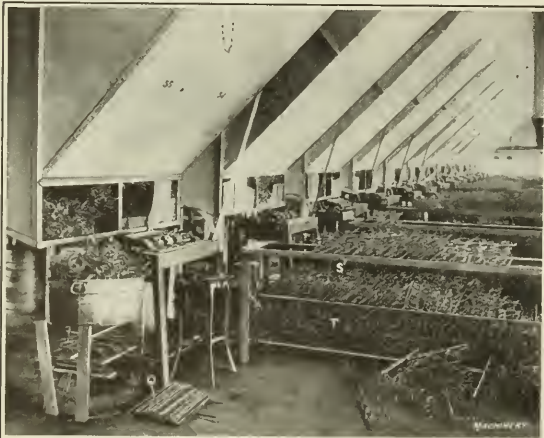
Forming Springs into Strips ready for assembling into Frames
